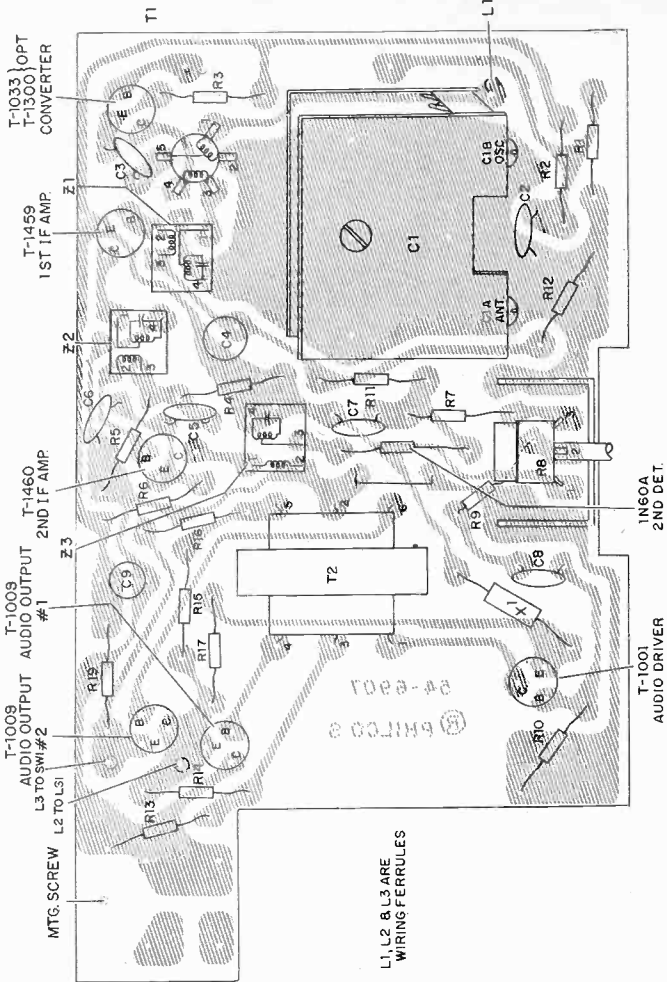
Component Panel Top View — Showing Parts Location and Tuning Adjustments
